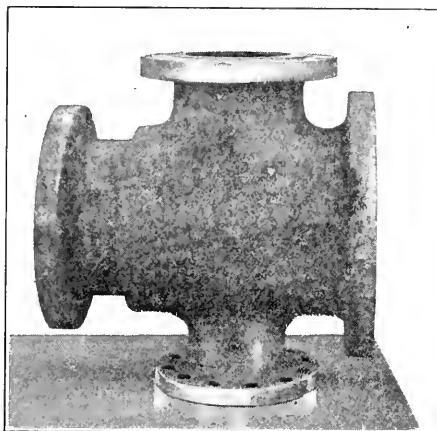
12 IN. BY 10 IN. BY 8 IN. BY 6 IN. EXTRA-HEAVY CAST IRON FITTING IN USE WITH SUPERHEATED STEAM, 1903-1908
